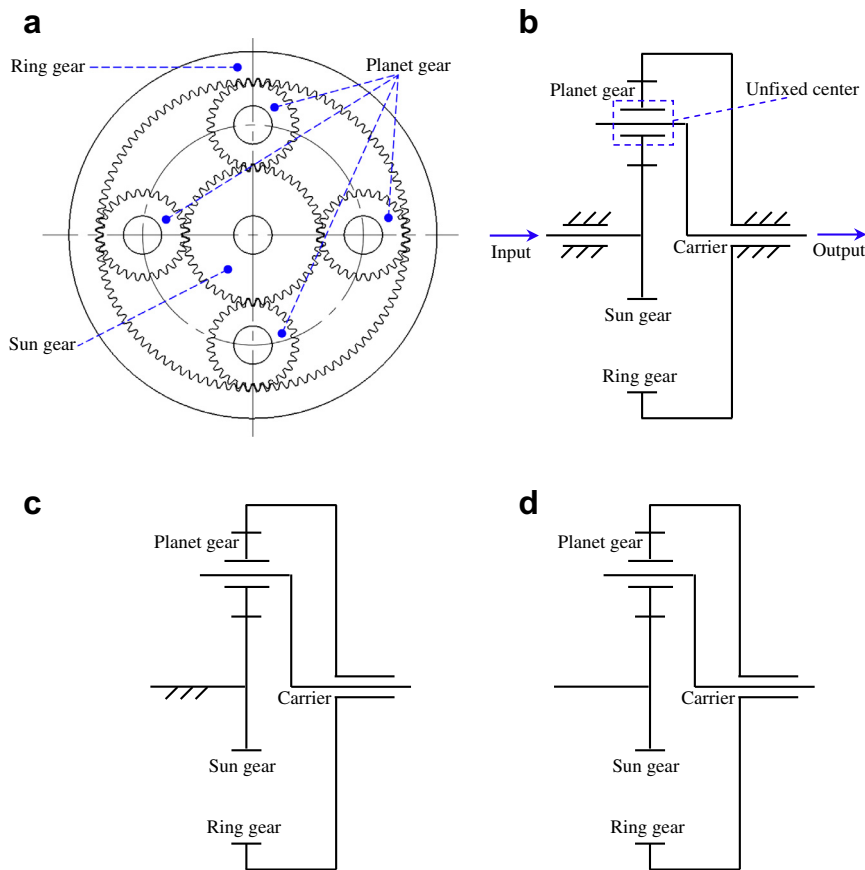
(a) An elementary planetary gear set having 4 planet gears, (b) scheme of planetary gear set with the standstill ring gear, (c) scheme of planetary gear set with the standstill sun gear and (d) scheme of planetary gearbox set with the rotating sun gear and the rotating ring gear.
